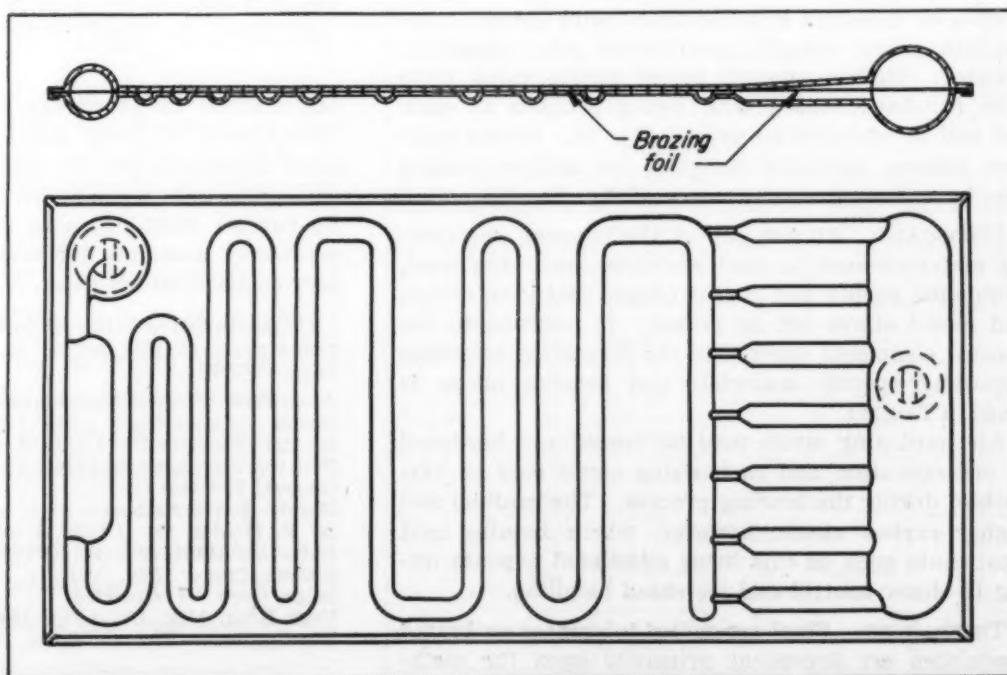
Right — Steel evaporator is assembled with foil and all four edges are folded over to retain alignment. Unit is brazed in the flat and later formed into the conventional U-shape
